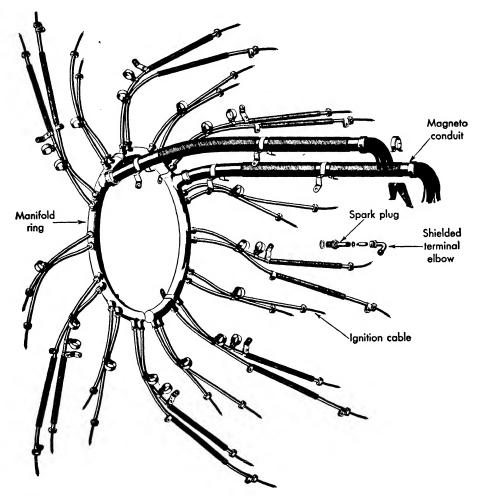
A radio shielded ignition wiring system for a 14-cylinder, two-row, radial aircraft engine. (Courtesy Wright Aeronautical Corporation)
